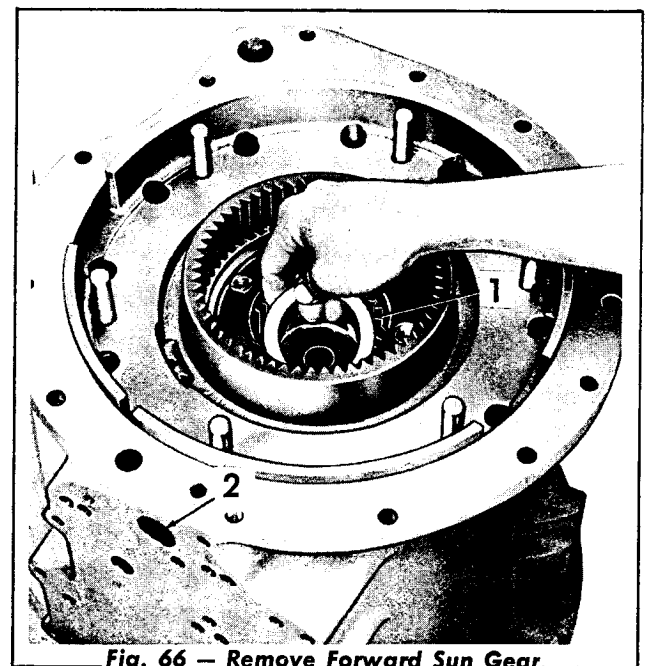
Remove Forward Sun Gear Thrust Washer
